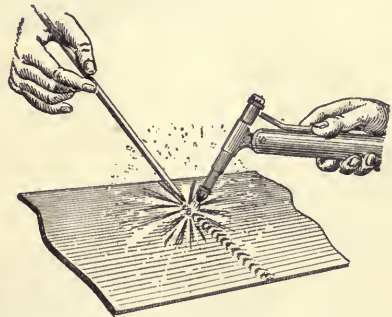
Position of welding rod for welding thin pieces of aluminium.
